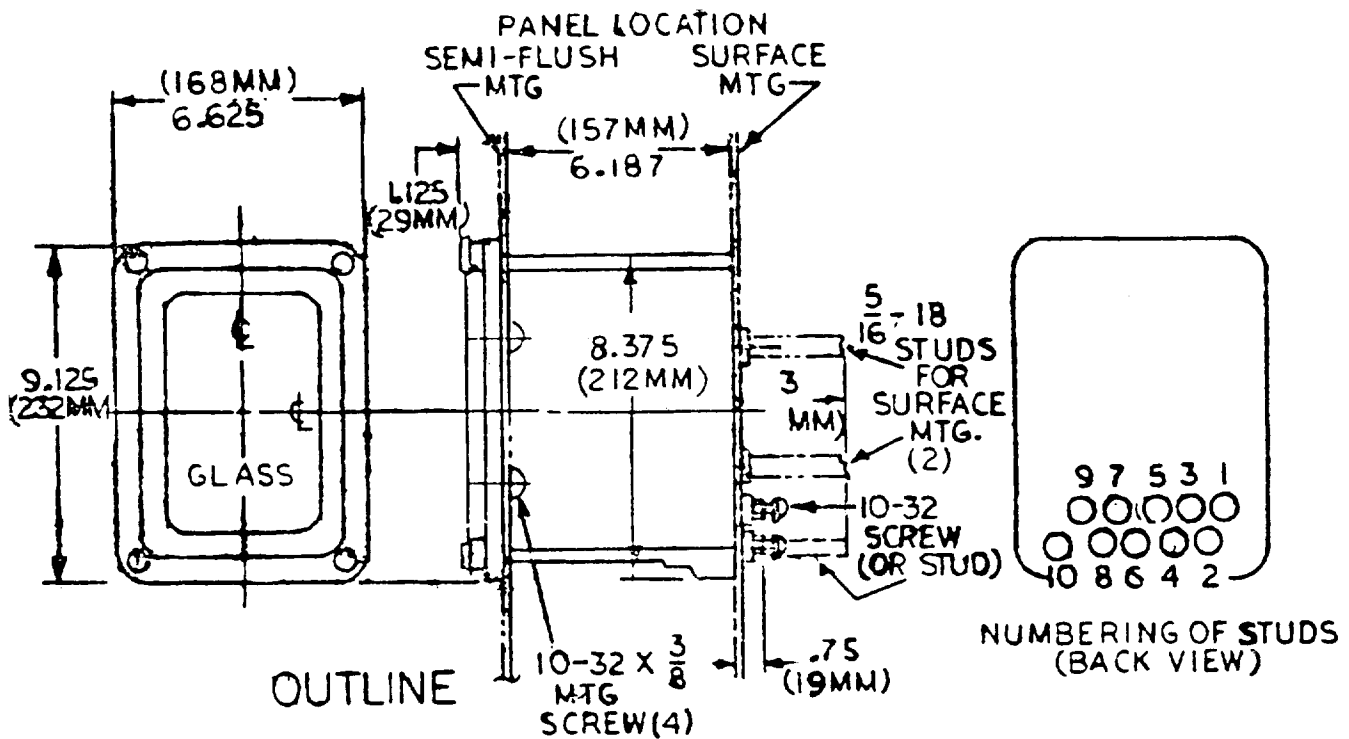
(K-6209271-7) Outline and Panel Drilling Dimensions for Type IAC66K Relays
